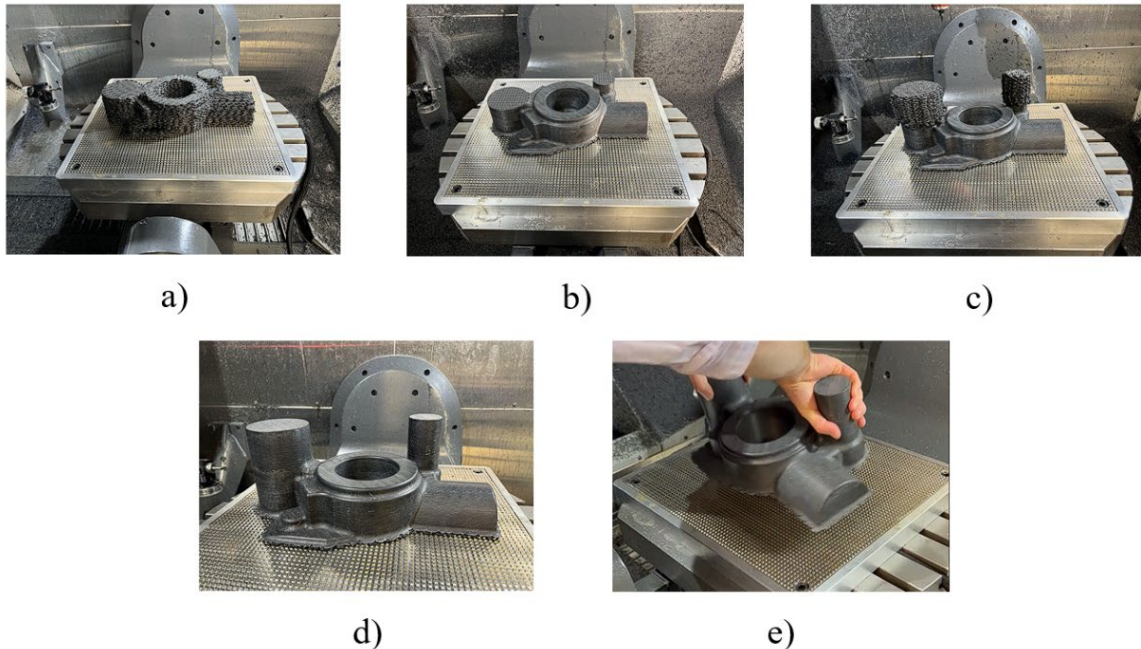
A demonstration casting pattern was produced by a) Printing the lower section of the part, b) machining surfaces and interlocking interface, c) printing upper sections of the part, d) final part machining, e) part removal after thermal release.
